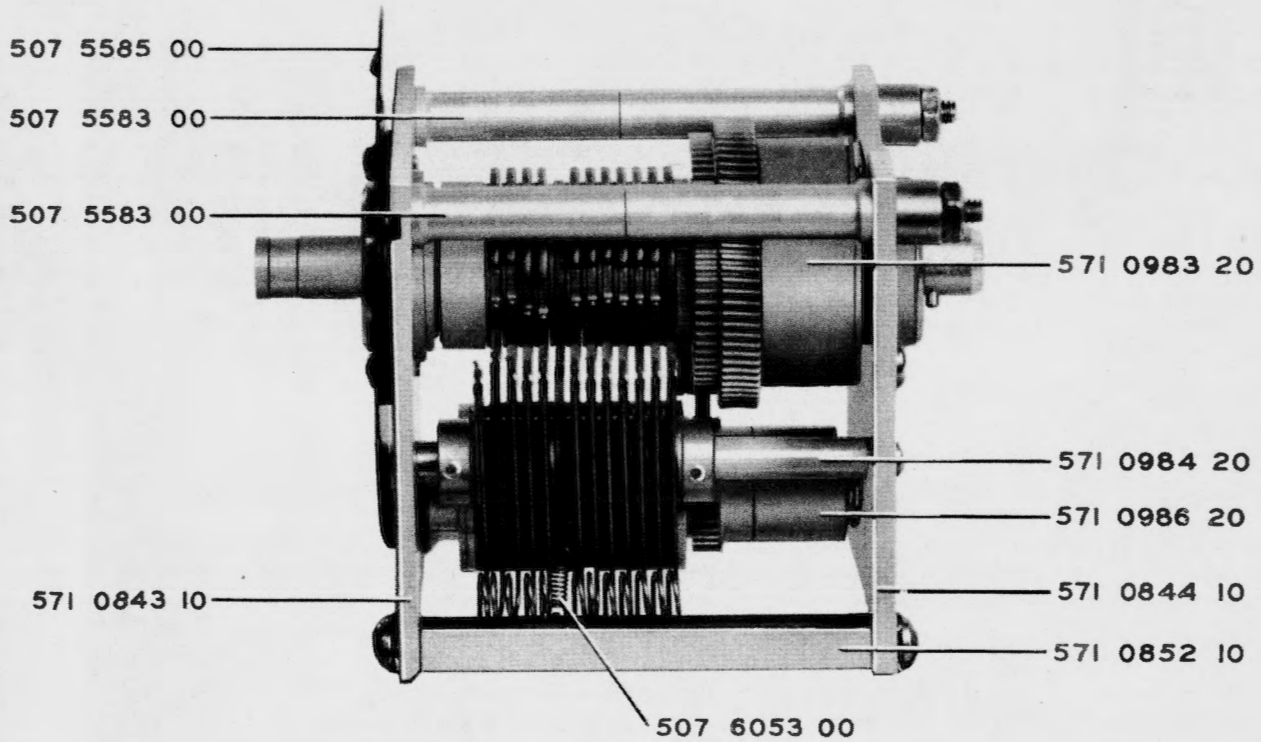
96J Autotune Singleturn Unit - Right Side View
